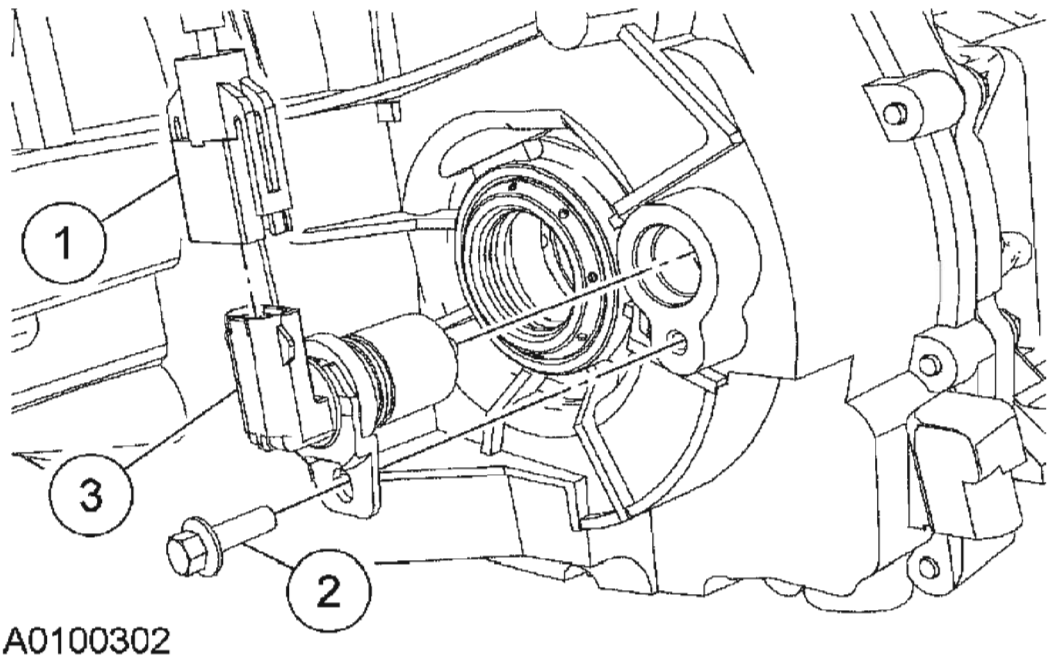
Removing Output Shaft Speed (OSS) Sensor
